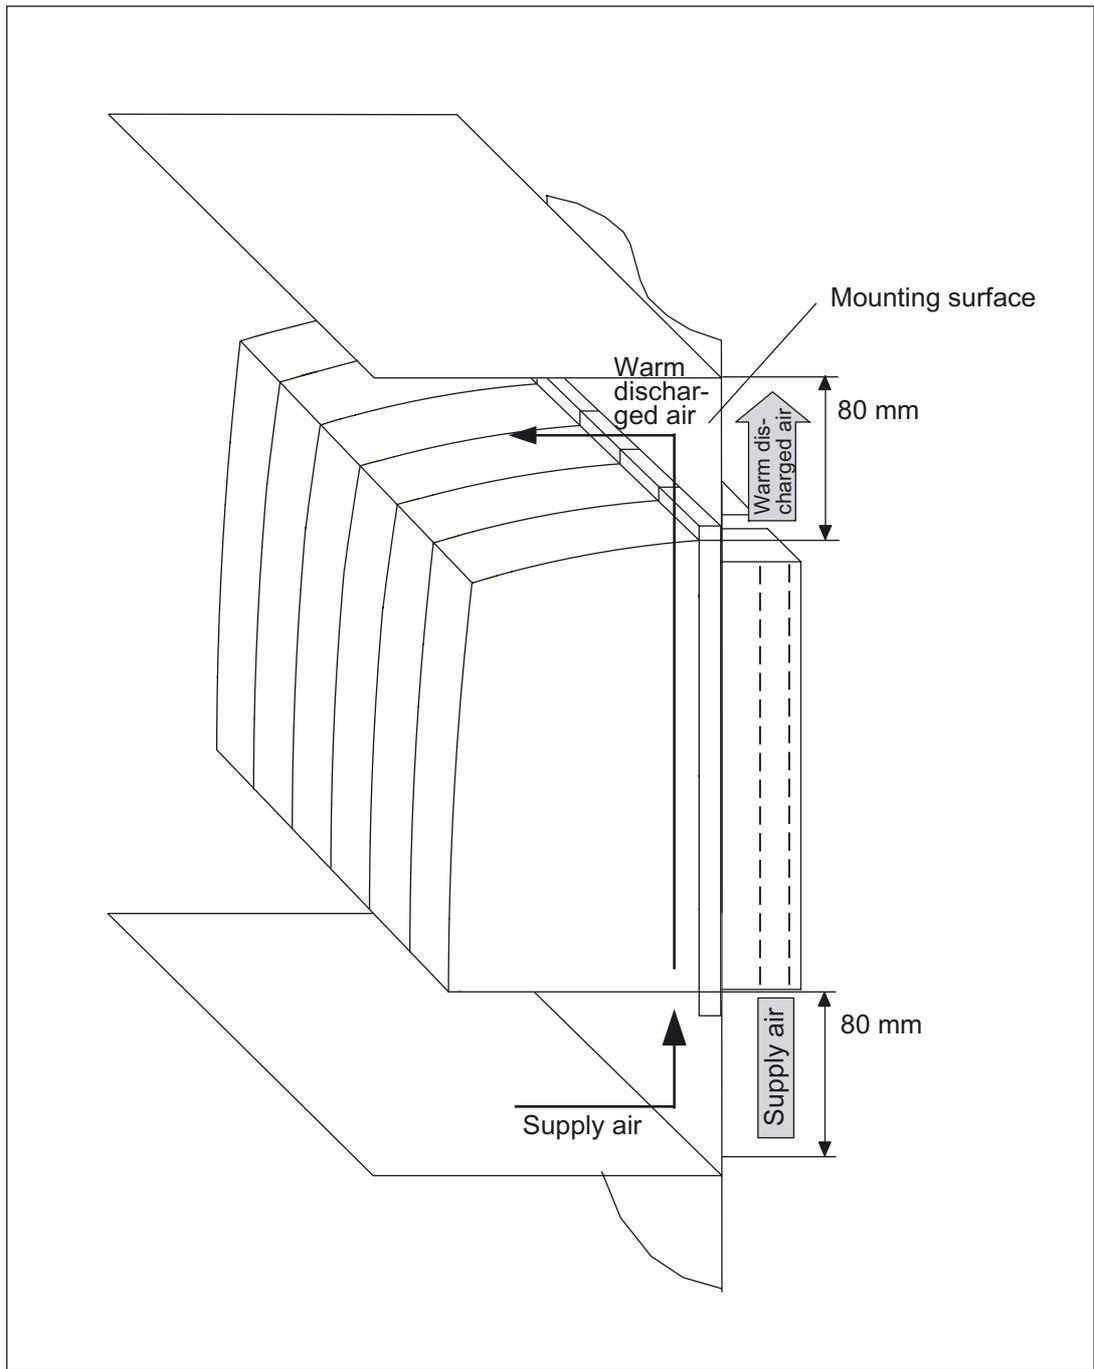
Clearances for booksize drive line-up with external air cooling
